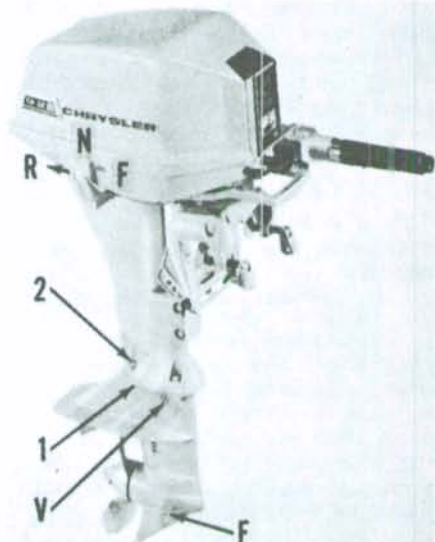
View of 9.2 hp motor showing two of the screws (2) and nuts (1) that attach upper gearcase housing to motor leg (exhaust housing).
